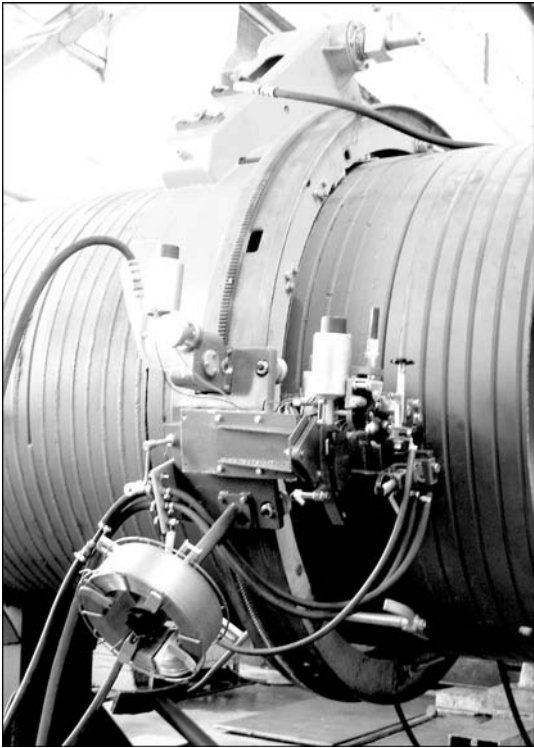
Welding machine of new-generation system «Styk» for automatic arc flux-cored wire position butt welding of large-diameter pipes with forced weld formation (manufacturer – OJSC «Kakhovka Plant of Electric Welding Equipment»)
